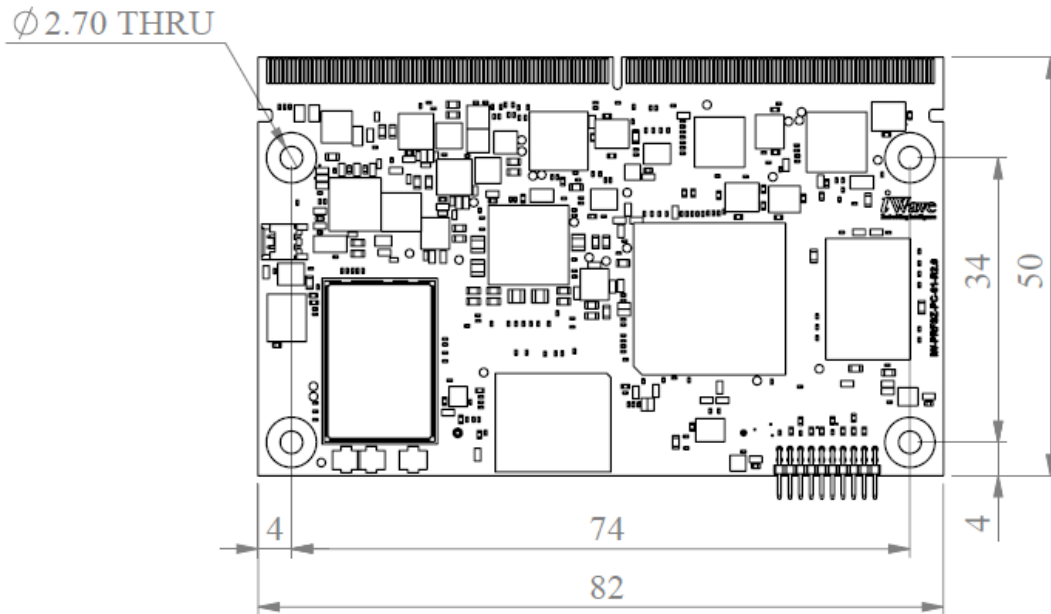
Mechanical dimension of i.MX8M SMARC SOM Top View
